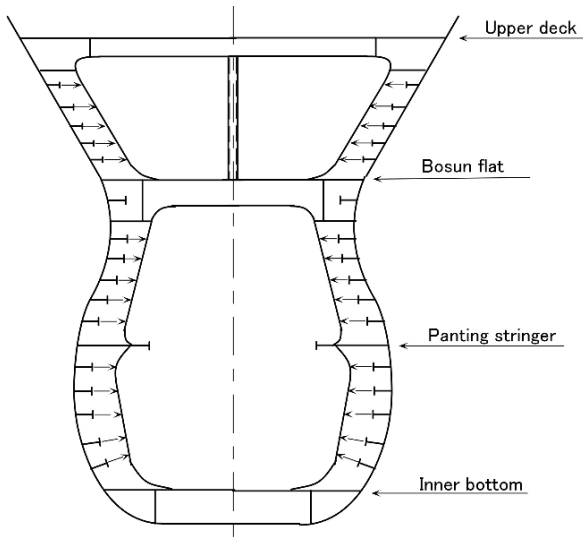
Fore construction (Longitudinal framing system)
